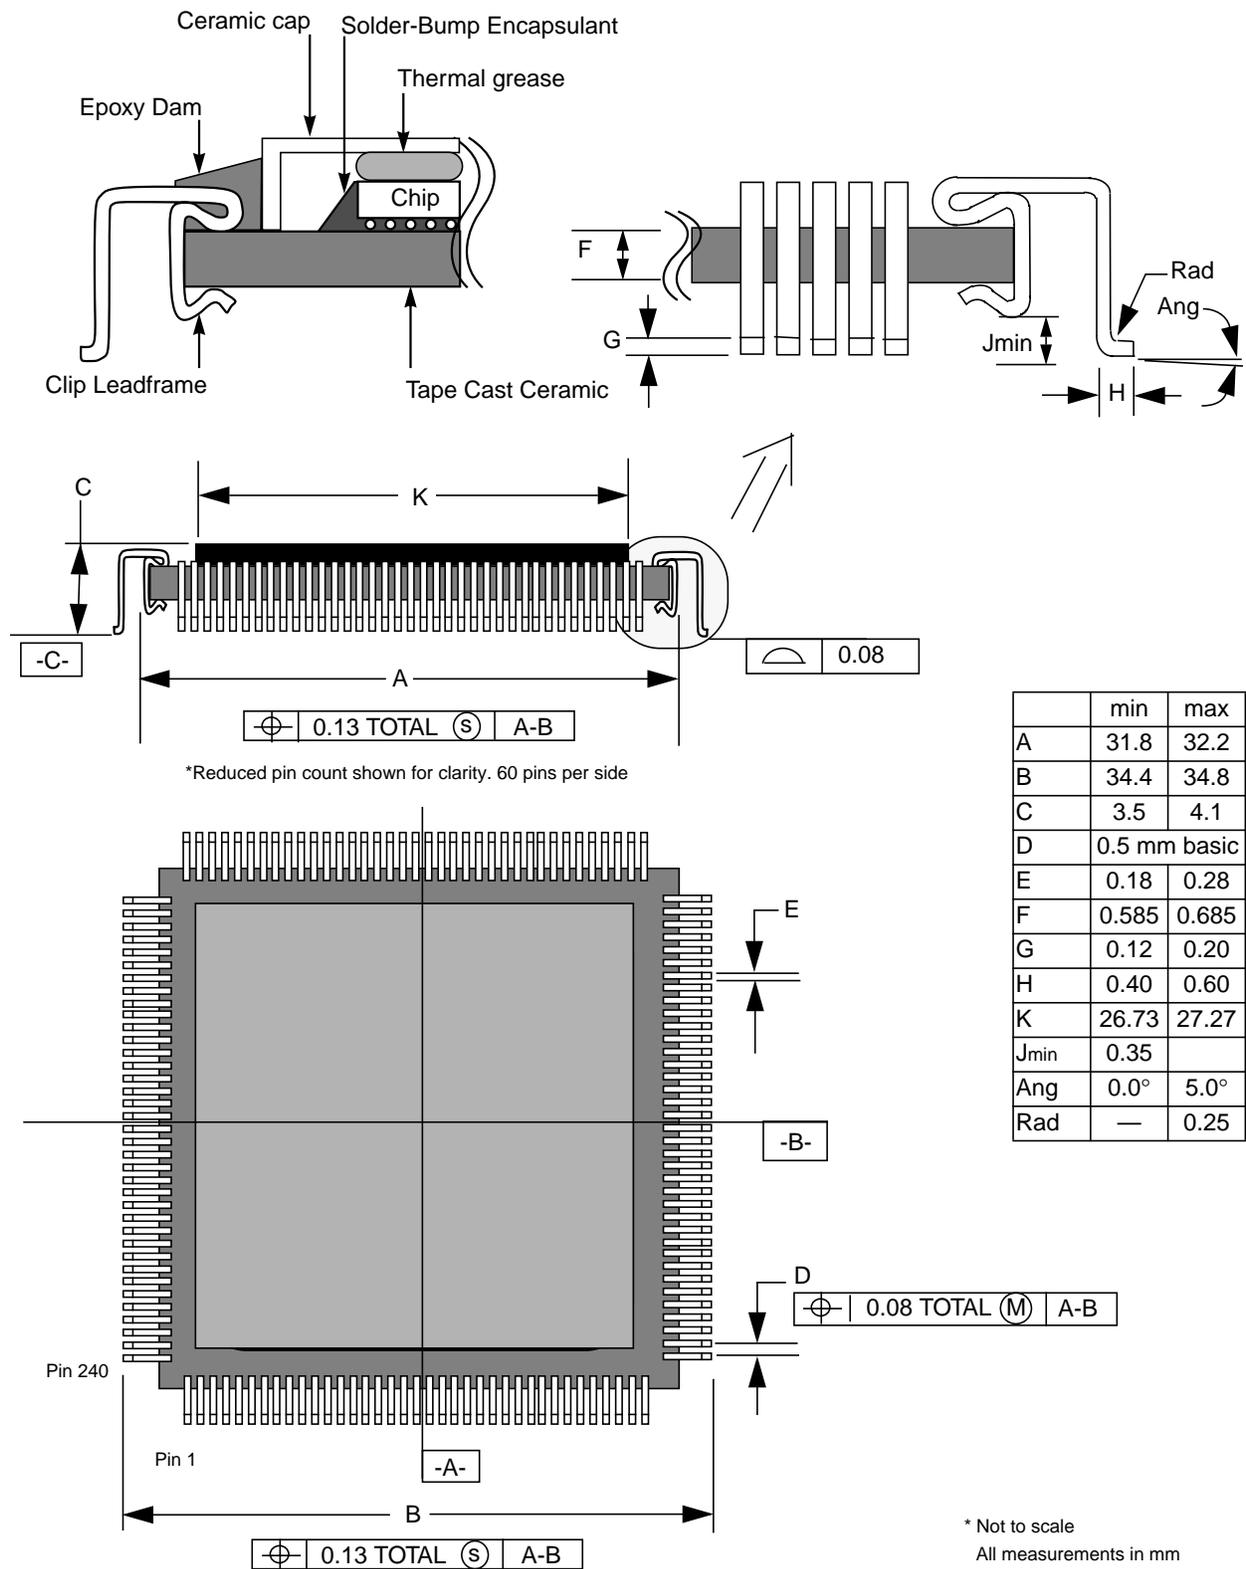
Mechanical Dimensions of the Solder-Bump C4FP Package with Cap
